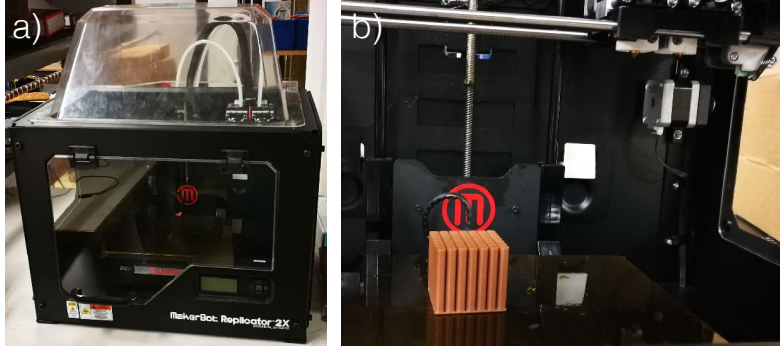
Photos: a) 3D printer: MakerBot®, Replicator™ 2X; b) Printing process: Fused Deposition Modelling(FDM).
